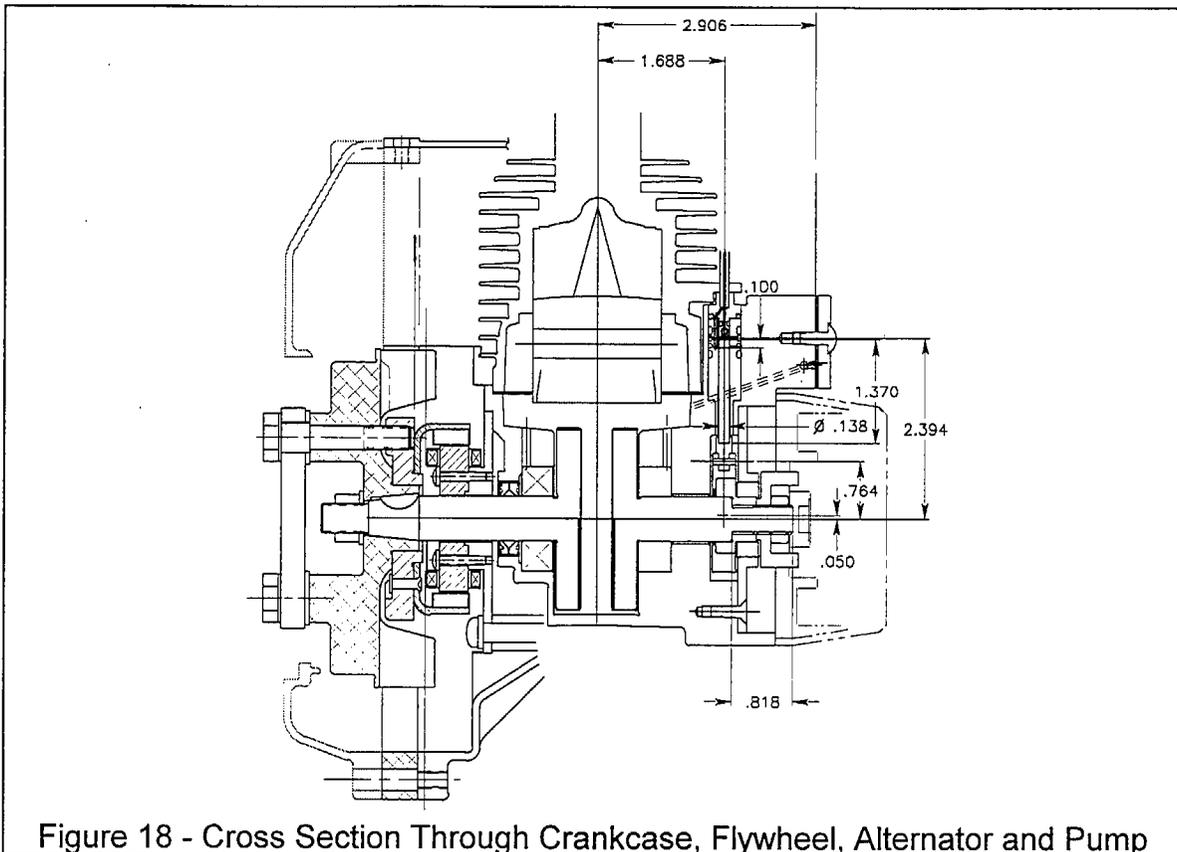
Cross Section Through Crankcase, Flywheel, Alternator and Pump
